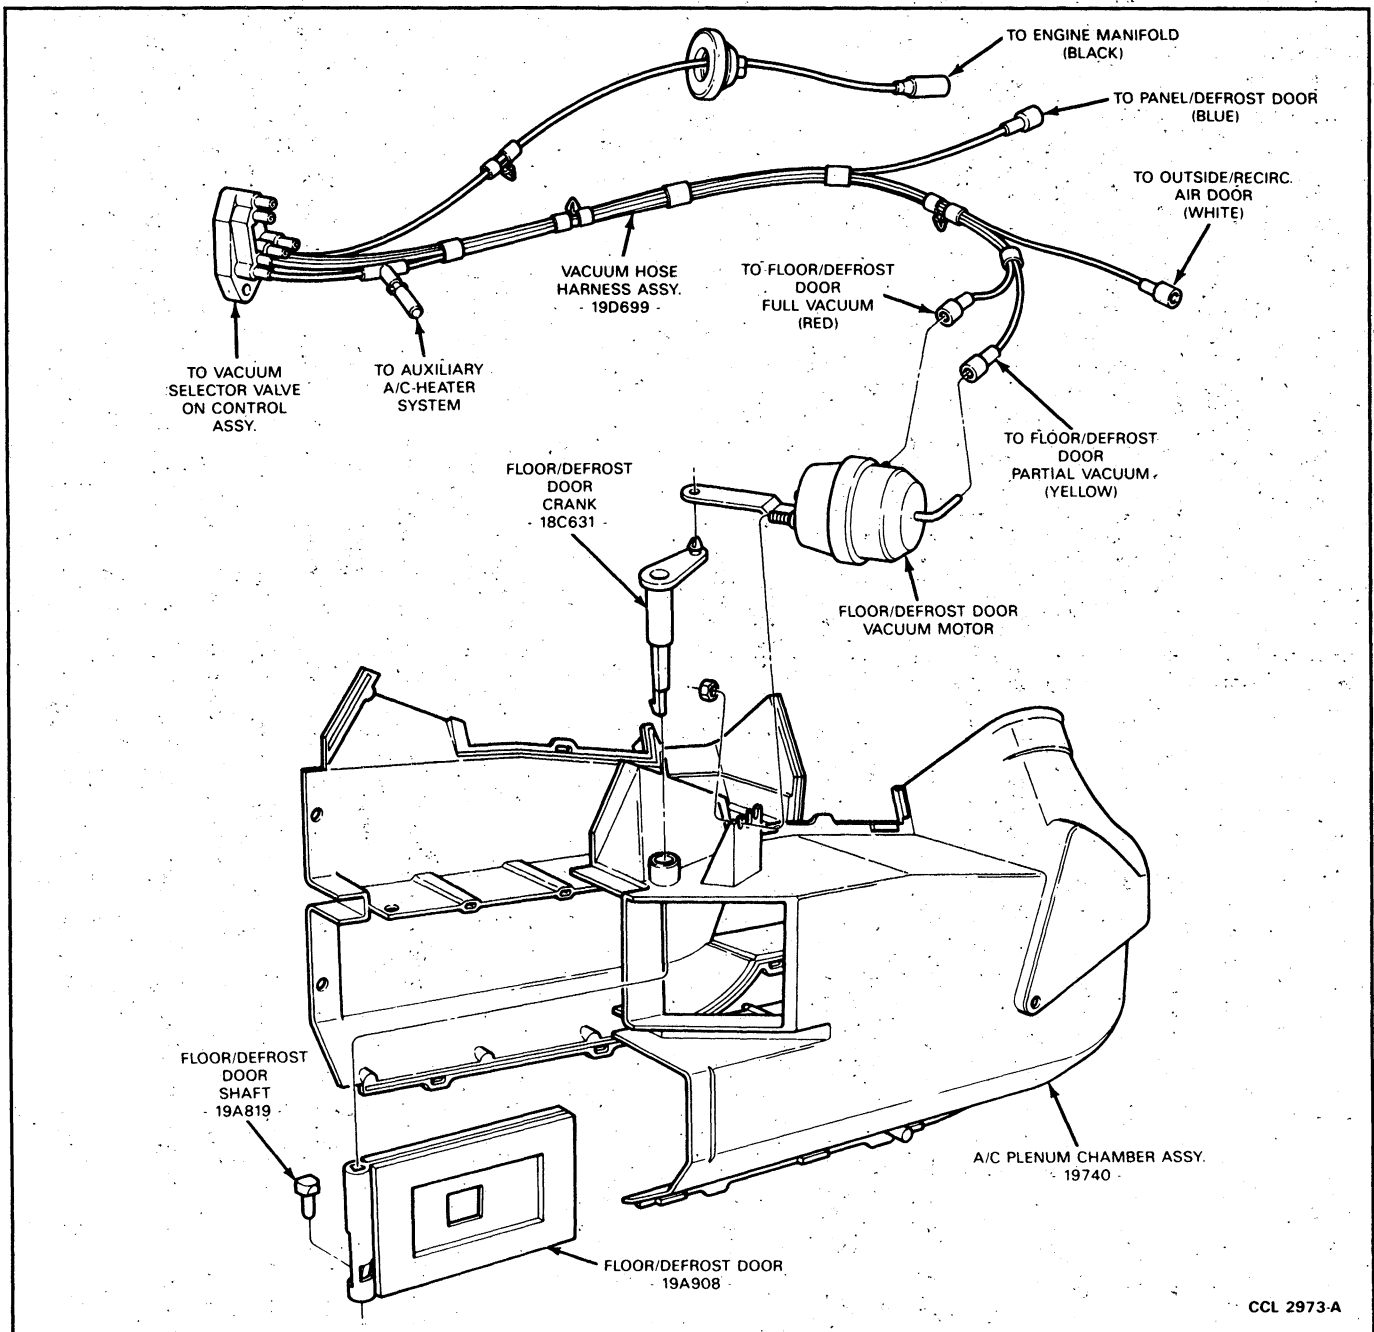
Typical Vacuum Motor to Plenum Installation and Harness Assembly
